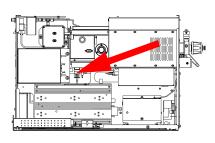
Vacuum Control PCB Mounting Screws (Front View)
